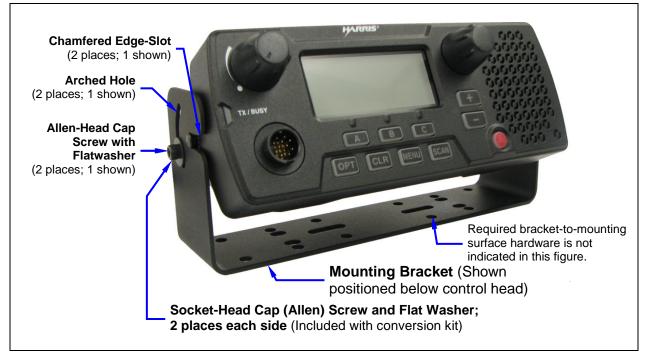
Control Head Mounting Bracket (shown positioned below head)
